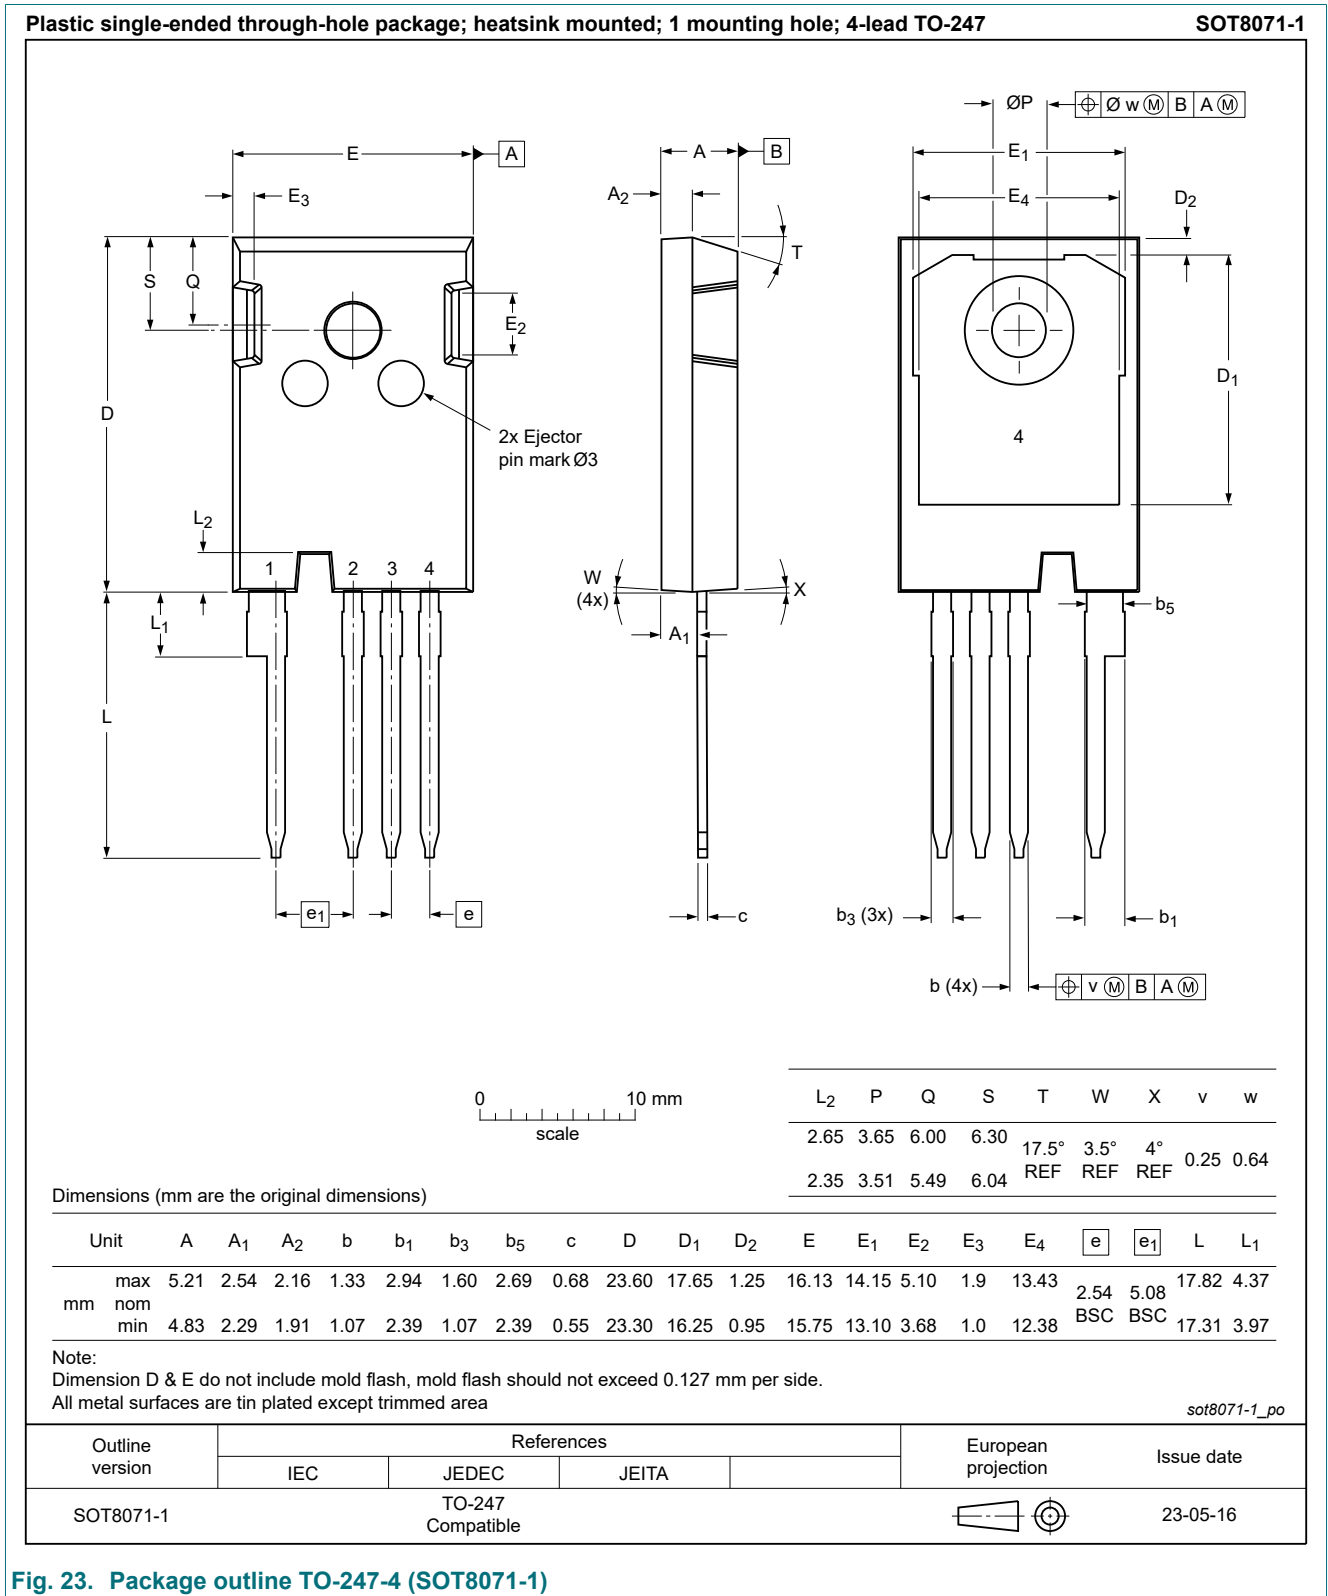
Package outline TO-247-4 (SOT8071-1)
